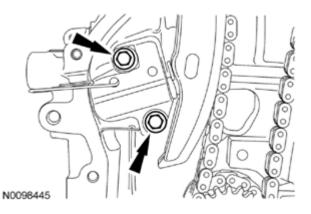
Locating Timing Chain Tensioner Bolts Courtesy of FORD MOTOR CO.
